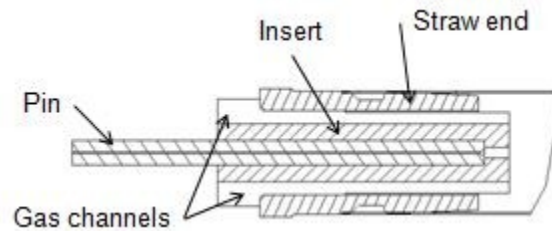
End detail of a straw. The pin crimps the wire inside it, and plastic inserts hold the crimp pins in place. The plastic inserts contain slots for gas to flow through the straws. (Image courtesy of John Carroll, University of Liverpool).
